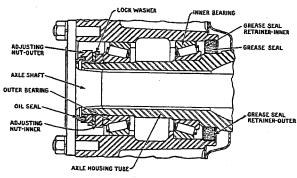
, D-30, DS-30, D-30B, DS-30B, D-300, DS-300, D-186T, DS-186T Rear
